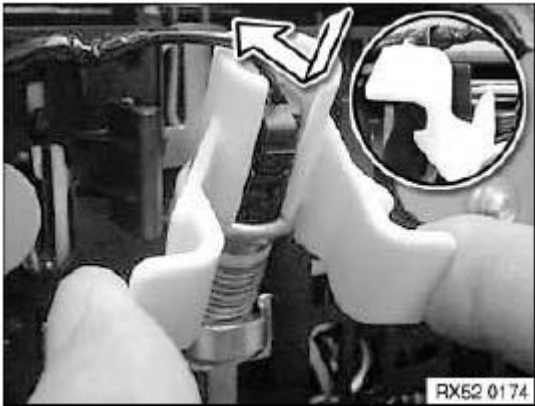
Pressing Retainer For Pyrotechnical Device Lugs
